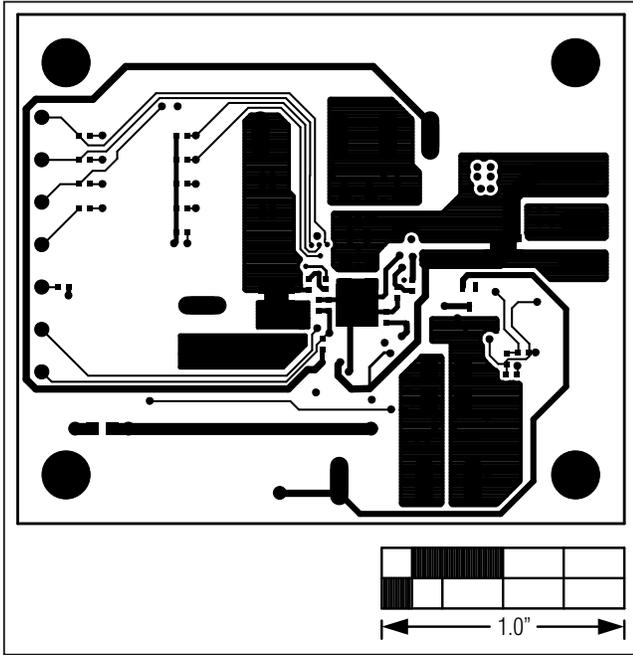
MAX17019N EV Kit PCB Layout—Solder Side
